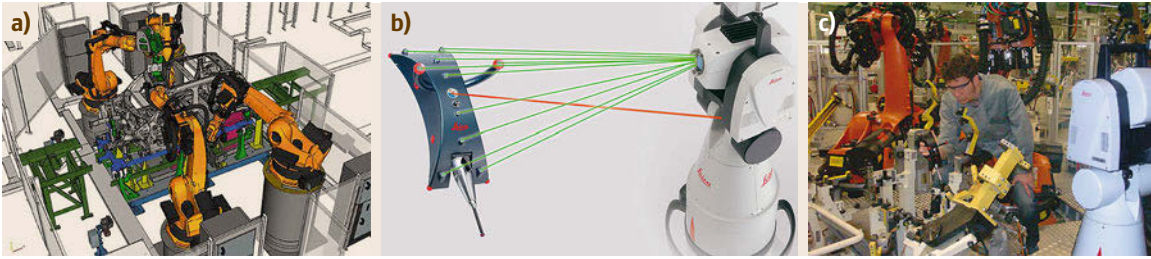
c Offline programming of a spot welding workcell. (a) The robot workcell and the task execution are modeled on the basis of realistic robot models (geometry, kinematics, kinetics). (b) The shown laser tracker is a portable measurement system that relies on laser beams to accurately measure in a radial volume (accuracy of $\pm 10 \text{ ppm} = 10 \mu\text{m/m}$, up to 80 m in diameter, measuring rate up to 3000 points/s). If measured objects cannot be equipped with reflecting targets or reached by the tracker, handheld probes are tracked instead. (c) A tracker in use for interactively measuring the geometry of the robot workcell (courtesy of Leica, now Hexagon MI)
